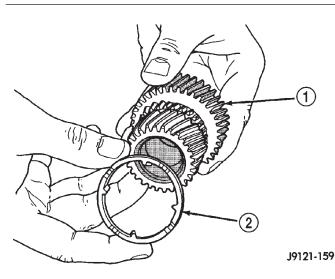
Installing Spacer On Sun Gear 1 – SUN GEAR 2 – SUN GEAR SPACER
